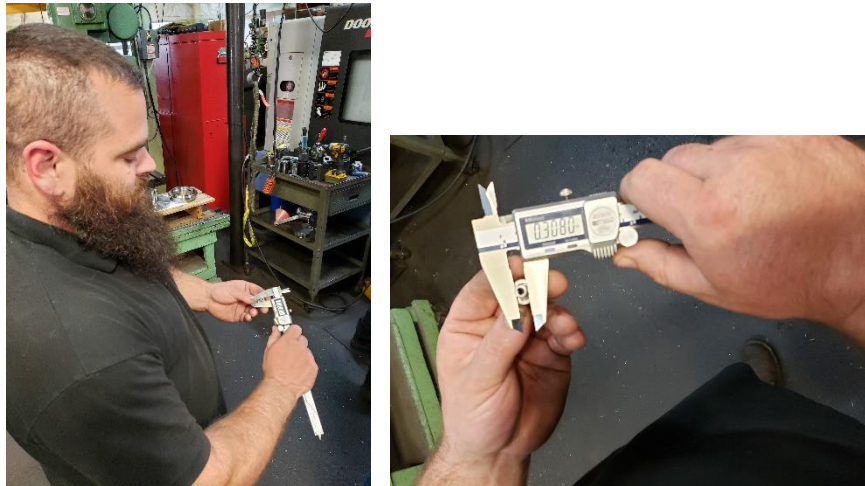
User measuring a part with a caliper with a resolution of 0.0005 in.
